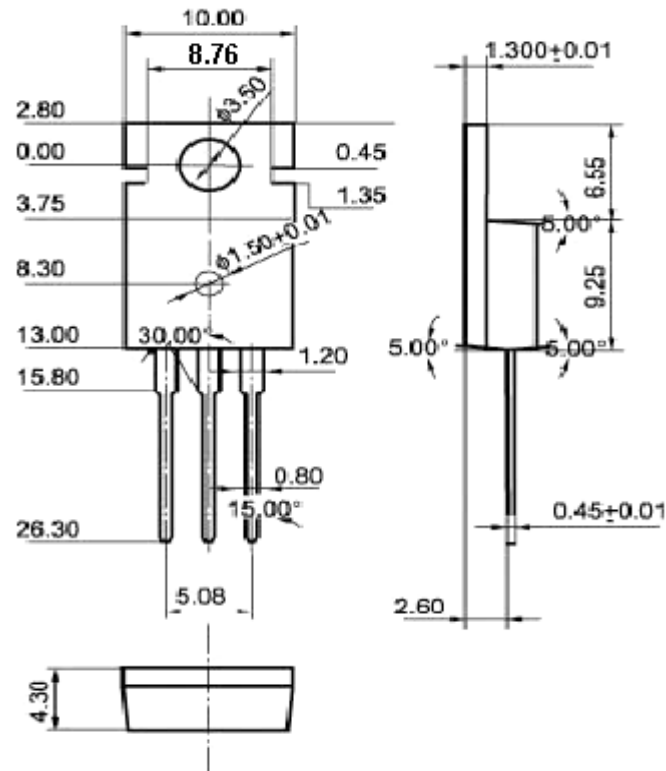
Outline dimensions (unindicated tolerance: ± 0.10 mm)
